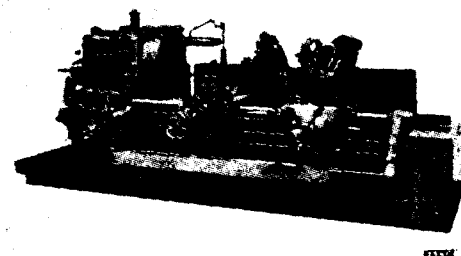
Herbert No. 8 Preoptive Combination Turret Lathe for chuck work up to 20" swing. Fitted with independent feed shafts to saddle and turret slide.
